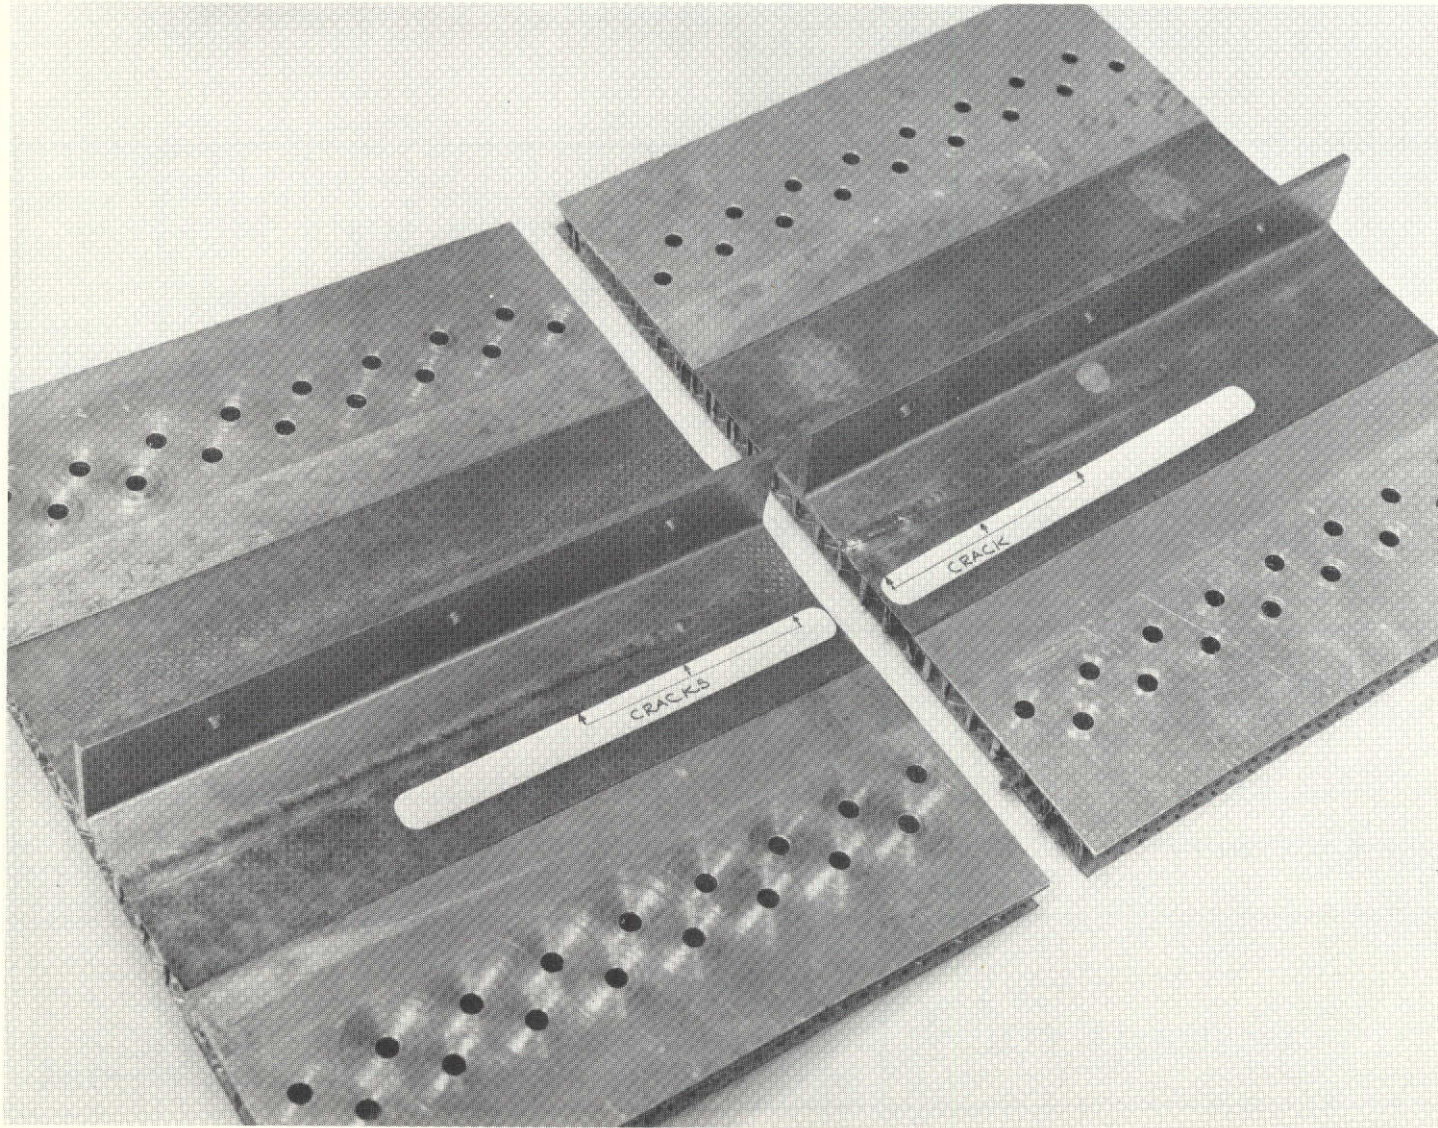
RAIL PANEL FATIGUE FAILURE
